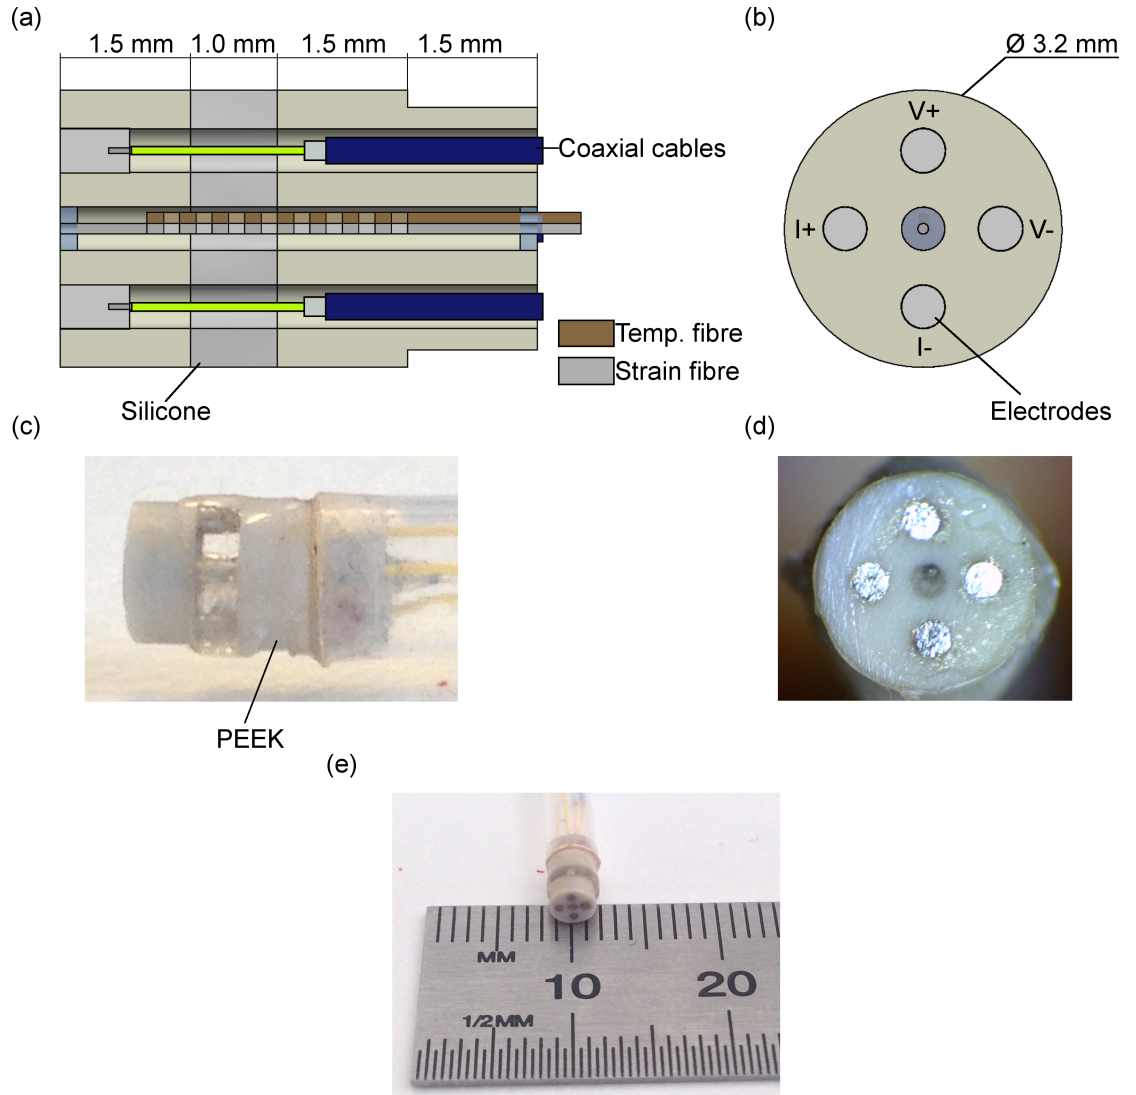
Drawings and images of electrical impedance probe: (a) Lateral cross-section of the probe design with coaxial cables, electrodes and fibres assembled. (b) Front view of the probe design. (c) Lateral view and (d) front view of the pencil probe. (e) Device end-effector after assembly.
